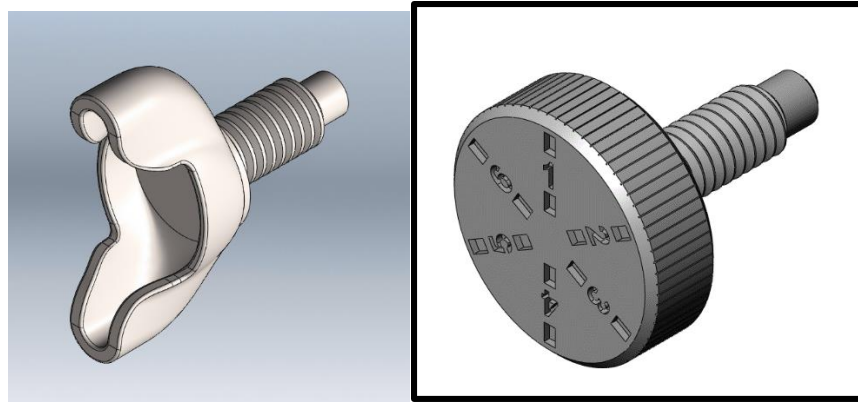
Left: Old Adjustment Screw, Right: New Adjustment Screw
